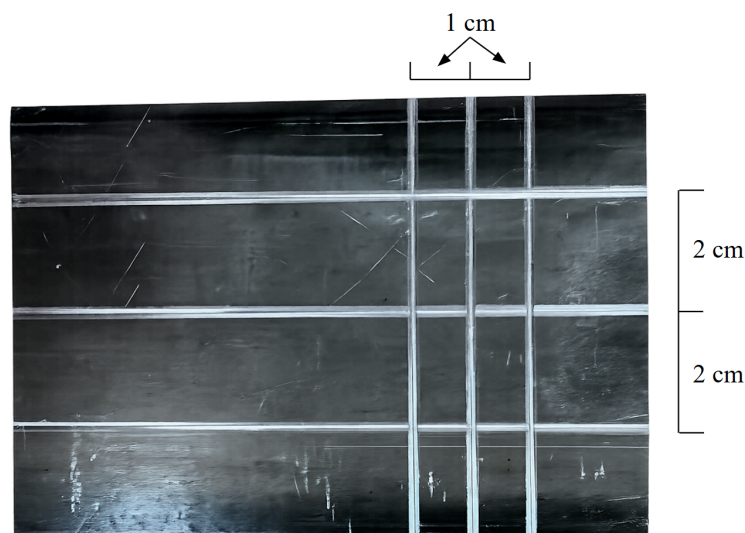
Final aluminum laser fixture for alignment and uniform manufacturing of graduated Bowman's probes
